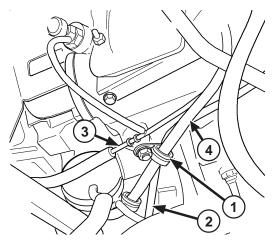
Fuel Lines and Wiring Harness Clamps Removal
